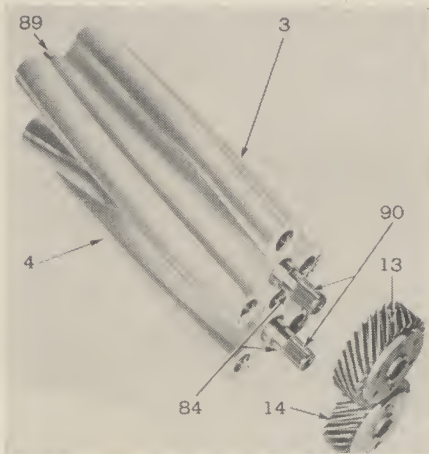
C—Lobes on upper rotor (3) and teeth on its drive gear (13) form a right hand helix. Lower rotor (4) and gear (14) have left hand helices.
